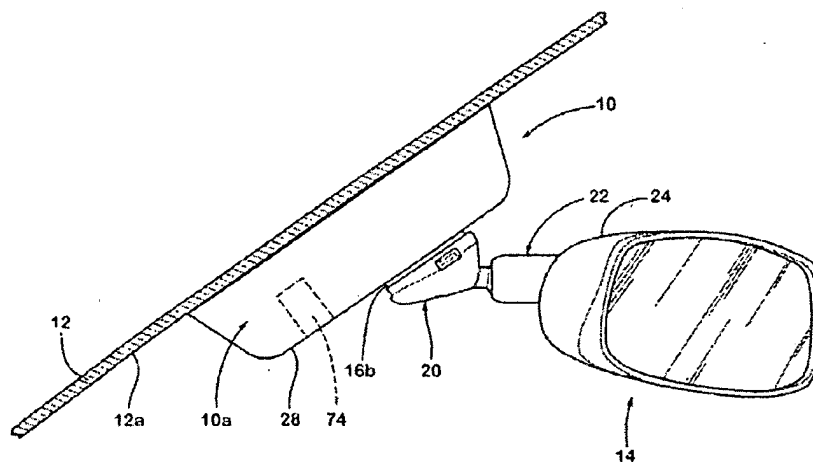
is a side elevation of accessory module 10 mounted to windshield 12, with a rearview mirror mounted to the module.
